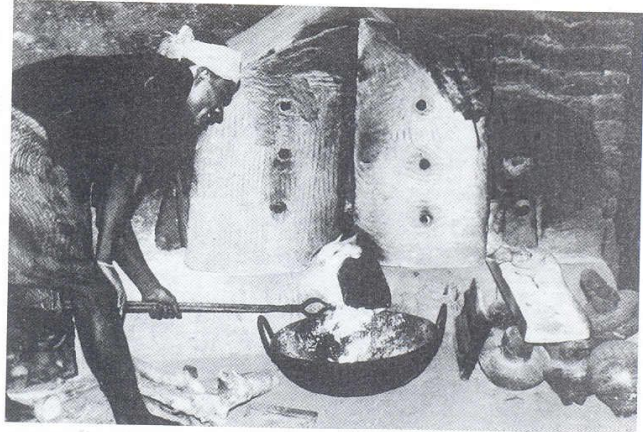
Traditional furnace at Nadavarambu for dewaxing, pre-heating mould and melting metal to be cast, with channel for collecting melted wax to one side.
